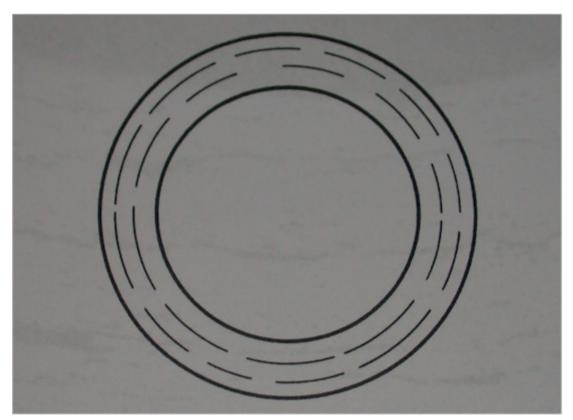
B - OCCURRENCE OF NON-METALLIC INCLUSIONS EXPECTED IN WELDED WIRE LINK
